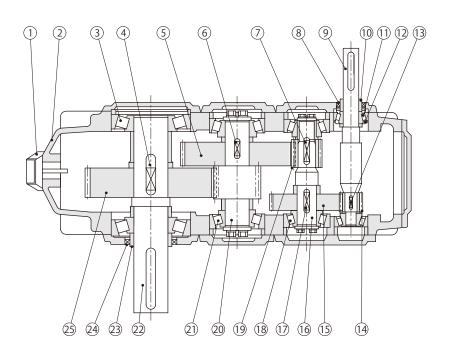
Horizontal Parallel Shaft Triple Reduction
